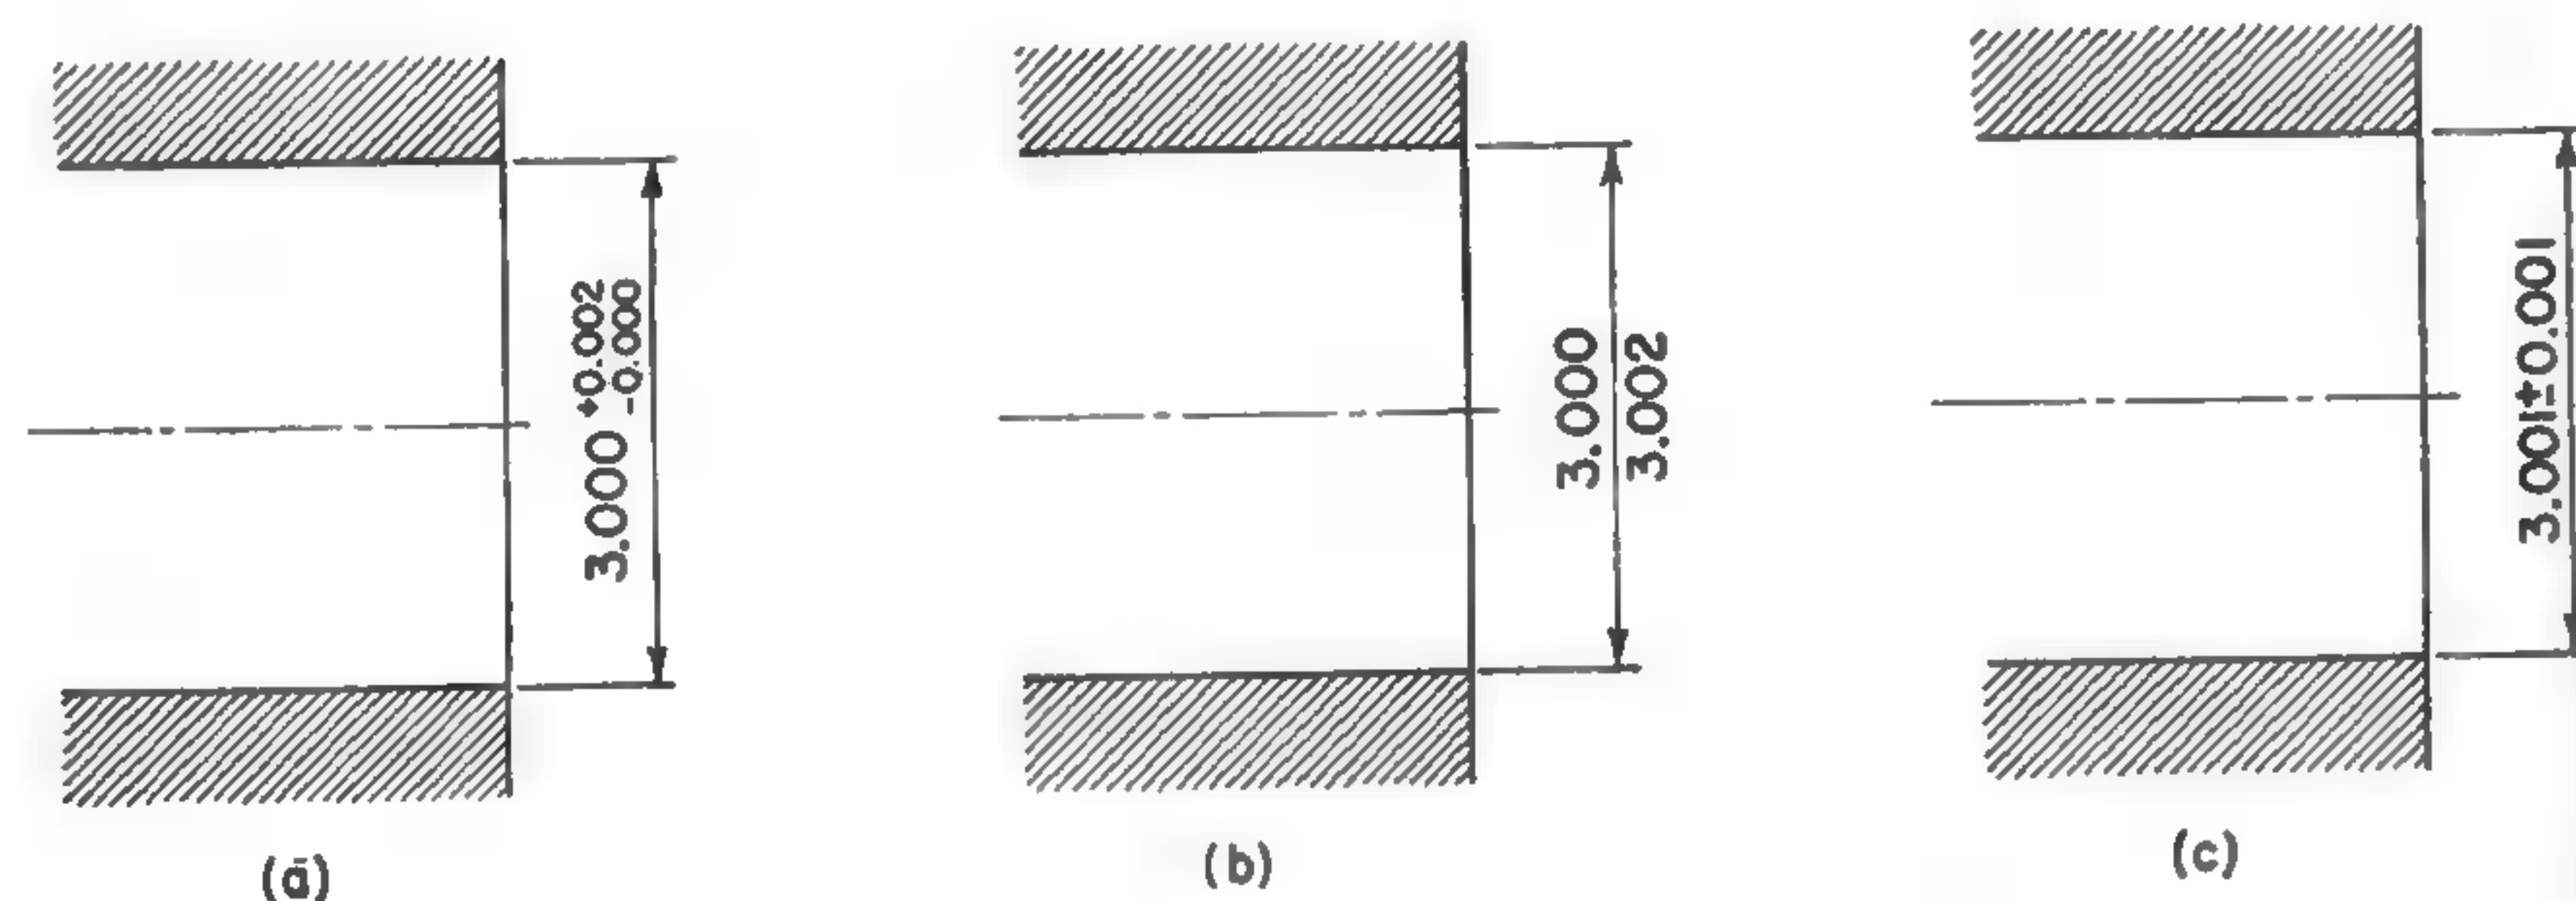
Methods of indicating tolerance for a hole.
